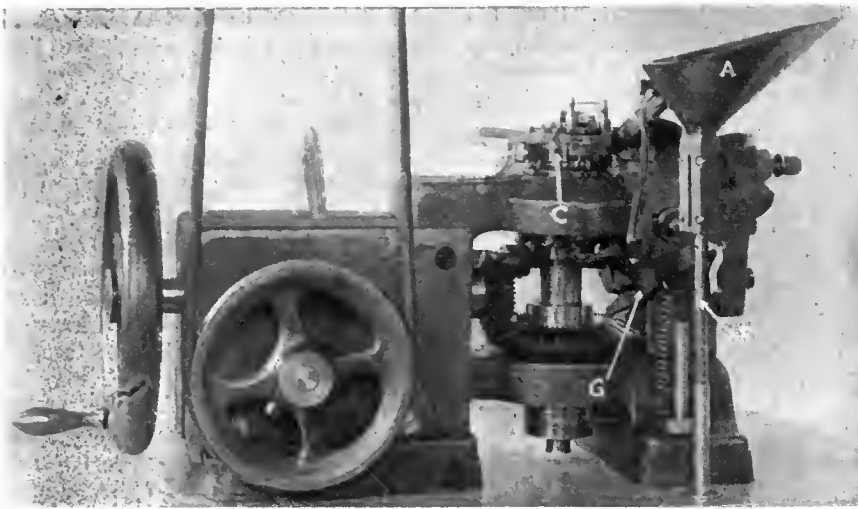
REAR VIEW SHOWING FEED MECHANISM
